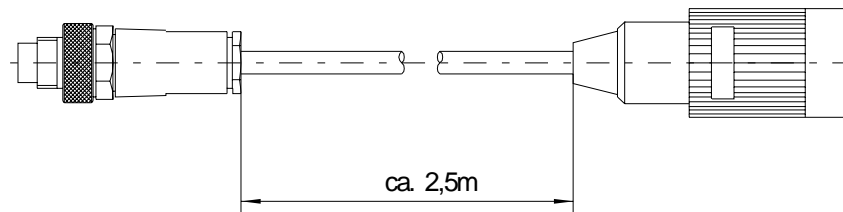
Dimensional Drawing Adapter Control MVC – HP 03
